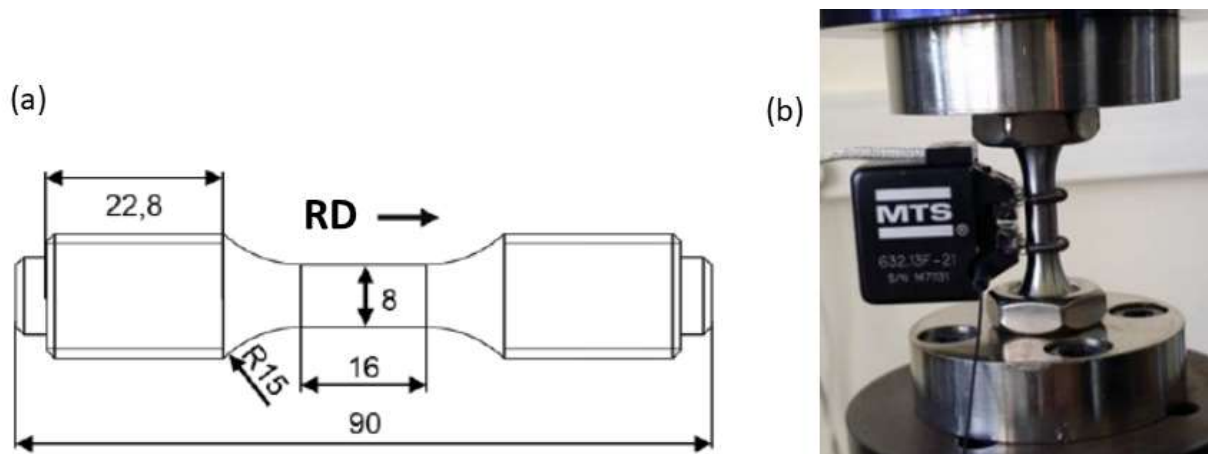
a) Geometry of the cylindrical specimens used for tension and cyclic tests and b) specimen with an extensometer mounted on the testing machine.
